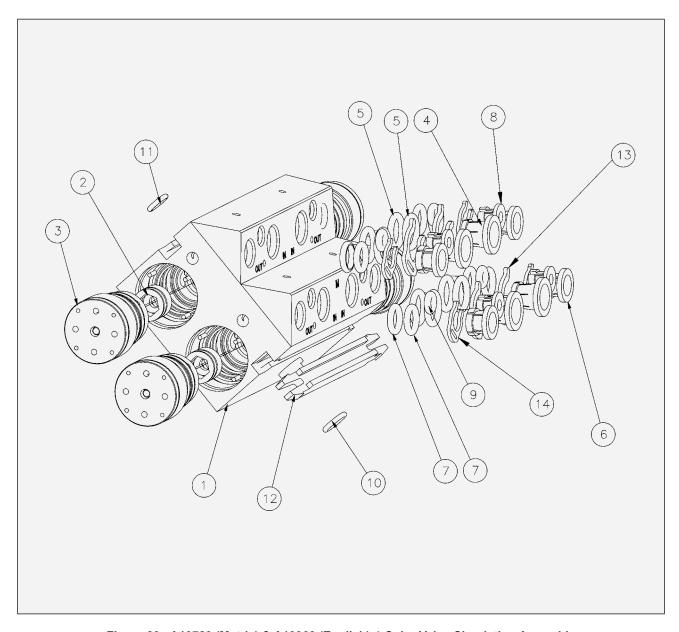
A10729 (Metric) & A10960 (English) 4-Color Valve Circulating Assembly
